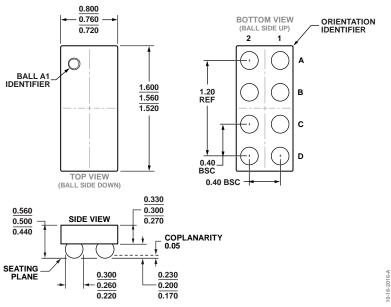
8-Ball Wafer Level Chip Scale Package [WLCSP] (CB-8-6) Dimensions shown in millimeters
